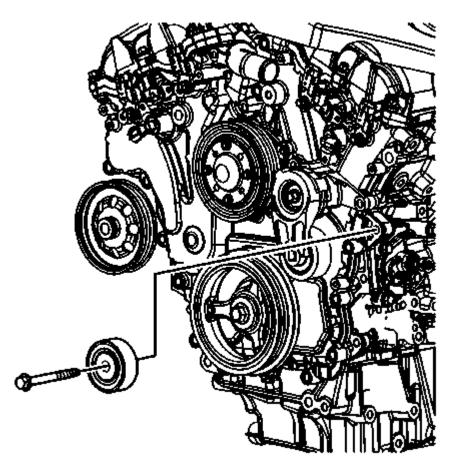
Identifying Drive Belt Idler Pulley & Bolt Courtesy of GENERAL MOTORS COMPANY
